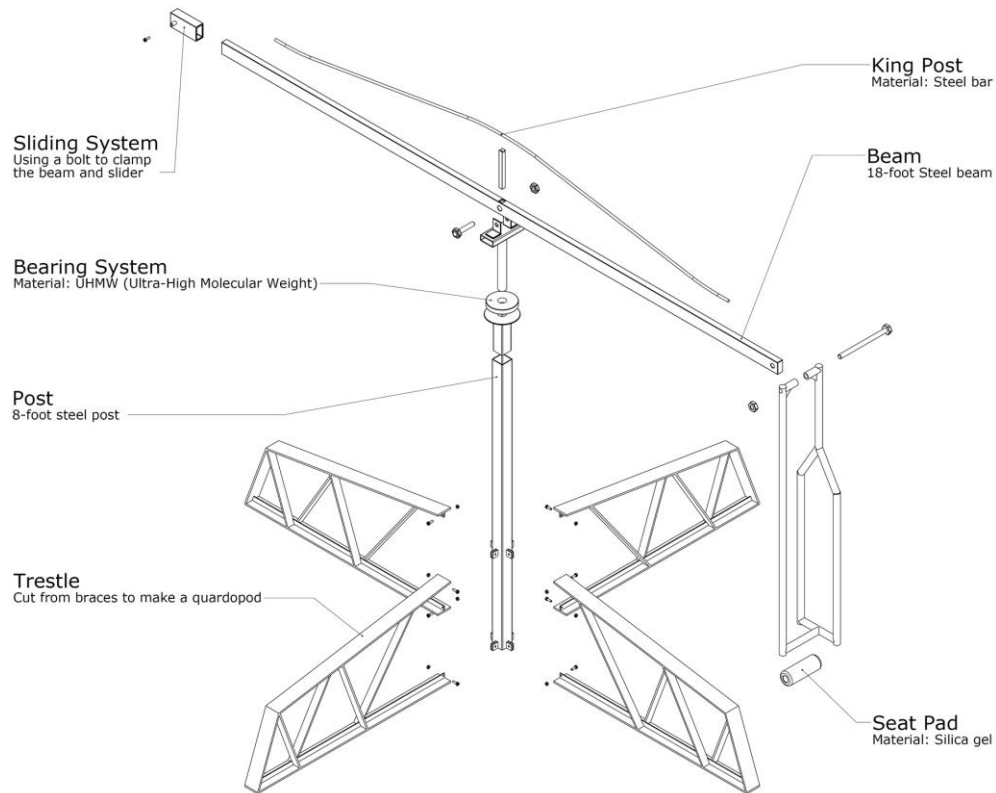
The structure is better seen in this exploded view of the Spacejump mockup.
